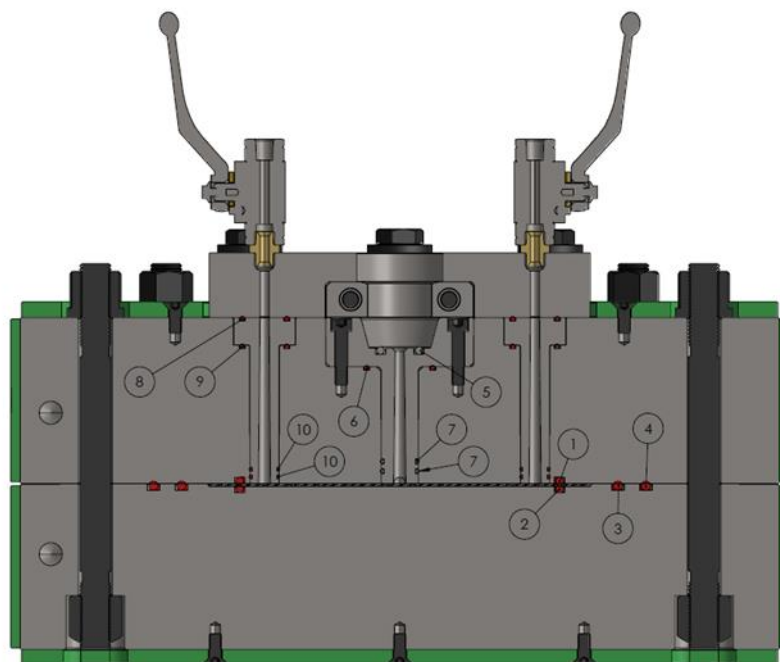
Array of mold sealing O-rings. 1) Upper clamping seal. 2) Lower clamping seal. 3) Mold cavity internal sealing O-ring. 4) Mold cavity external sealing O-ring. 5) Mold injection nozzle (male) sealing O-ring. 6) Mold injection nozzle (female) sealing O-ring. 7) Mold injection nozzle (female) cavity sealing O-ring. 8) Upper vacuum nozzle sealing O-ring. 9) Lower vacuum nozzle sealing O-ring. 10) Vacuum nozzle cavity sealing O-ring.
